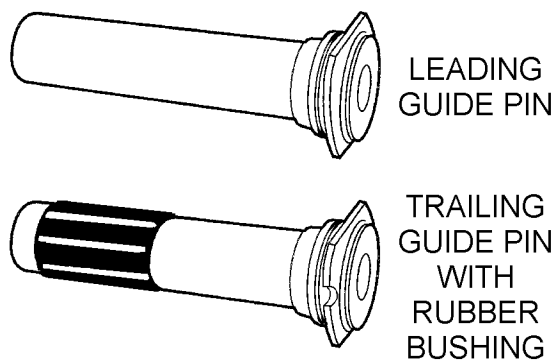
Leading Guide Pin and Trailing Guide Pin with Rubber Bushing
